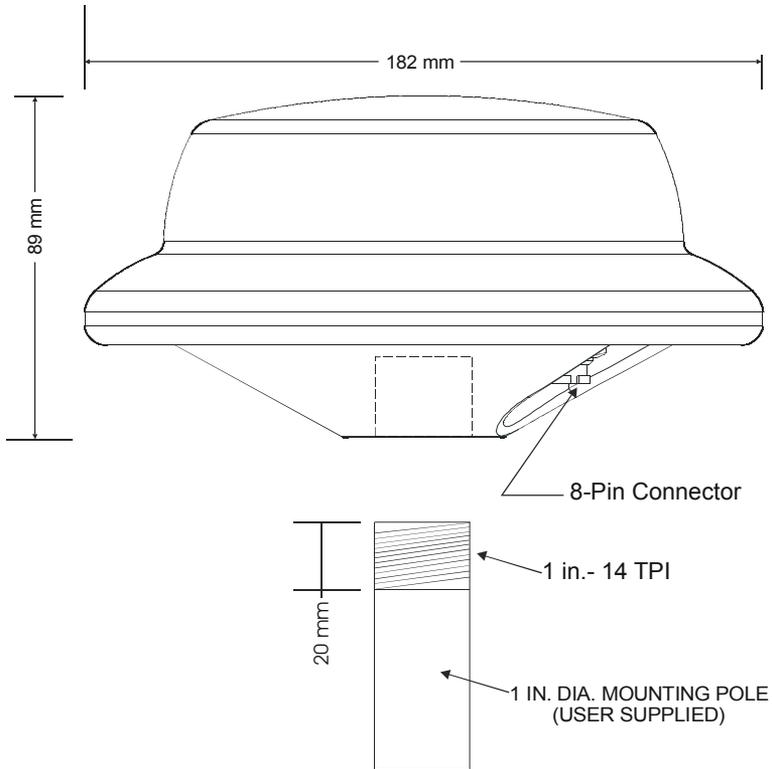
MX421/B Antenna Dimensions and Mount Specifications
